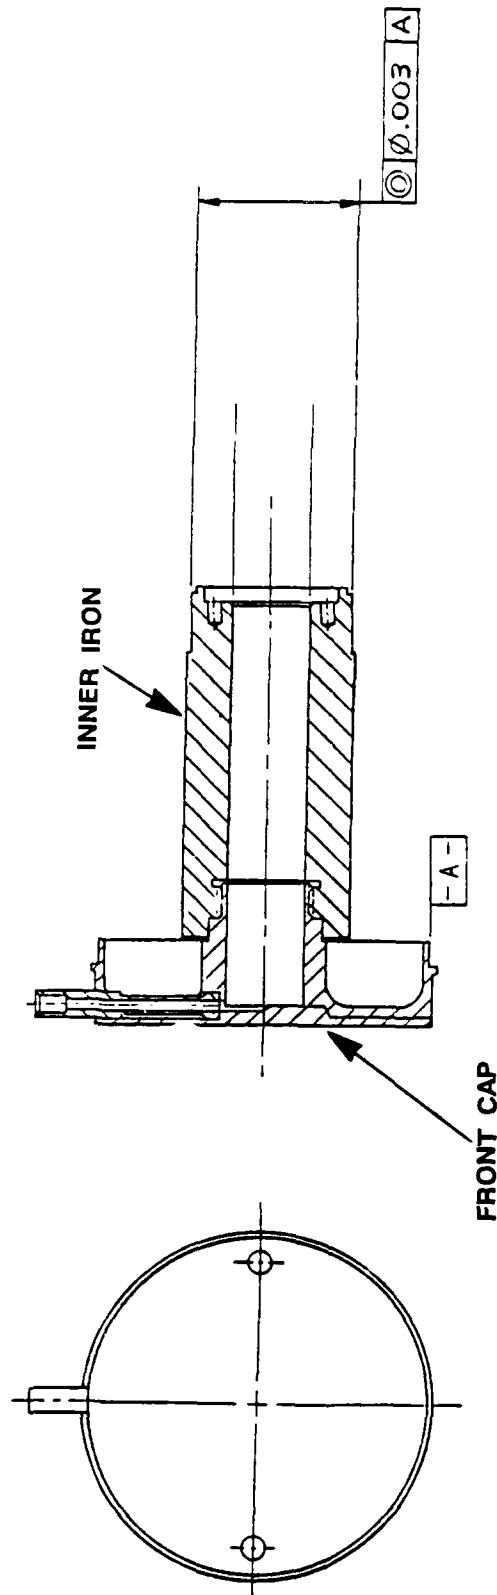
Front Cap/Inner Iron Subassembly
